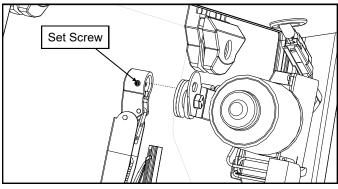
Install Wiper Arm onto Wiper Motor Shaft
